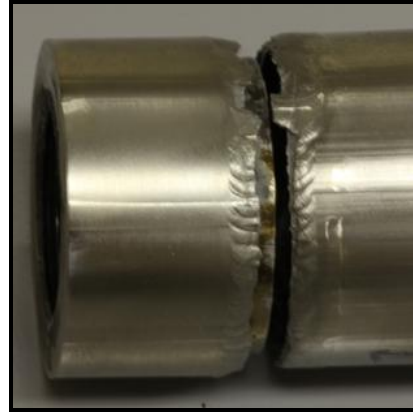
TF-WC6-FS seam weld fracture
